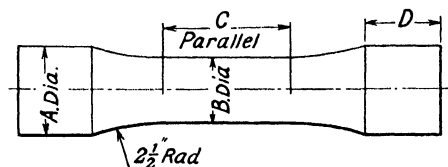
TENSILE TEST PIECE FOR CAST IRON
